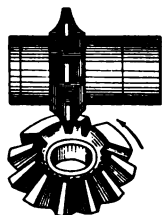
CUTTING A BEVEL GEAR BLANK WITH A FORMED MILLING CUTTER
